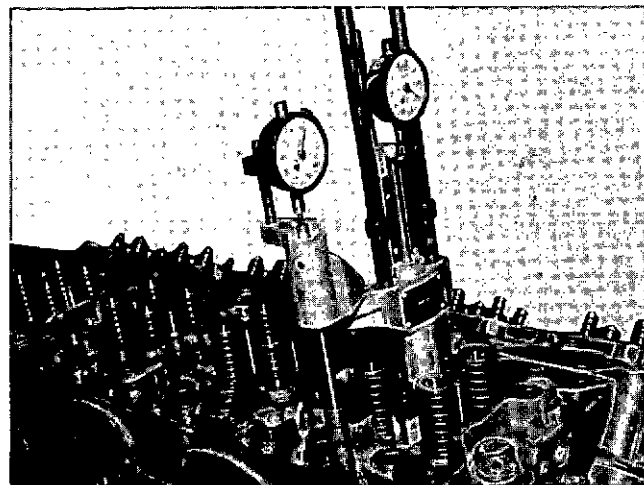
, V414143. ST-593 Injection Timing Fixture
